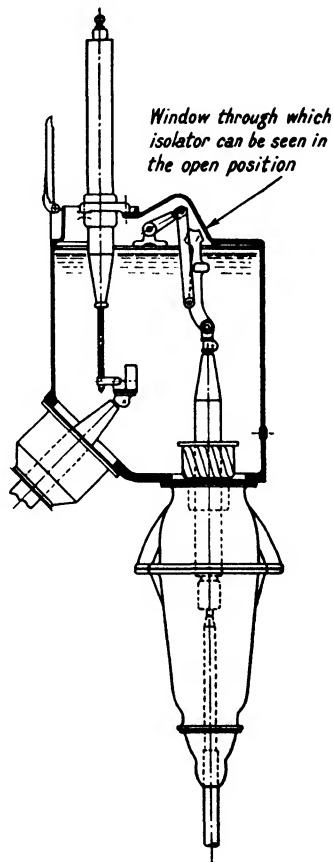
AN ALTERNATIVE POSITION OF THE TESTING BUSHING IN FIG. 245 ARRANGED IN THIS CASE FOR SWITCHGEAR TEST
